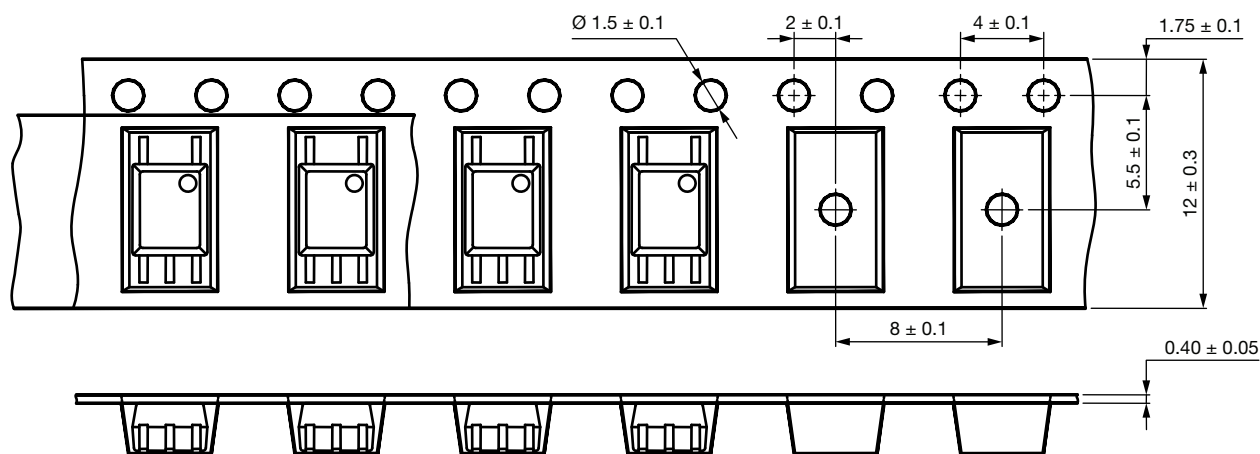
Tape and Reel Packing (3000 pieces on reel)
